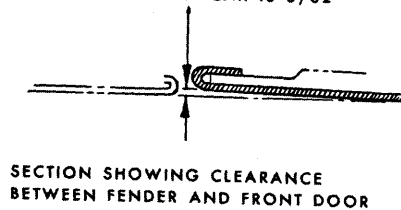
Specified Body Opening Clearance Tolerances - "F" Styles
